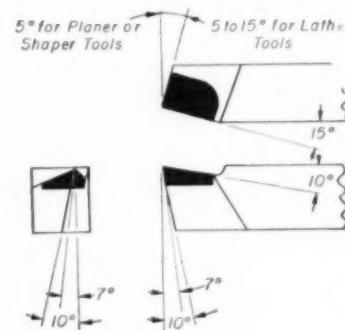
Tool for Turning, Boring, Planing or Shaping of Powder Metal Parts
